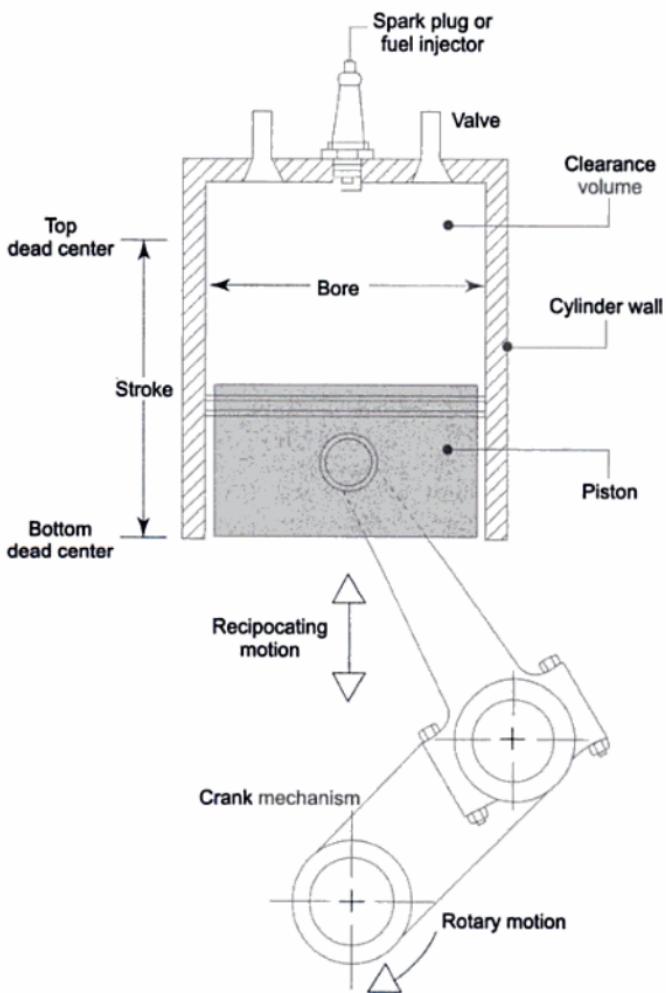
Nomenclature for reciprocating piston-cylinder engines.
